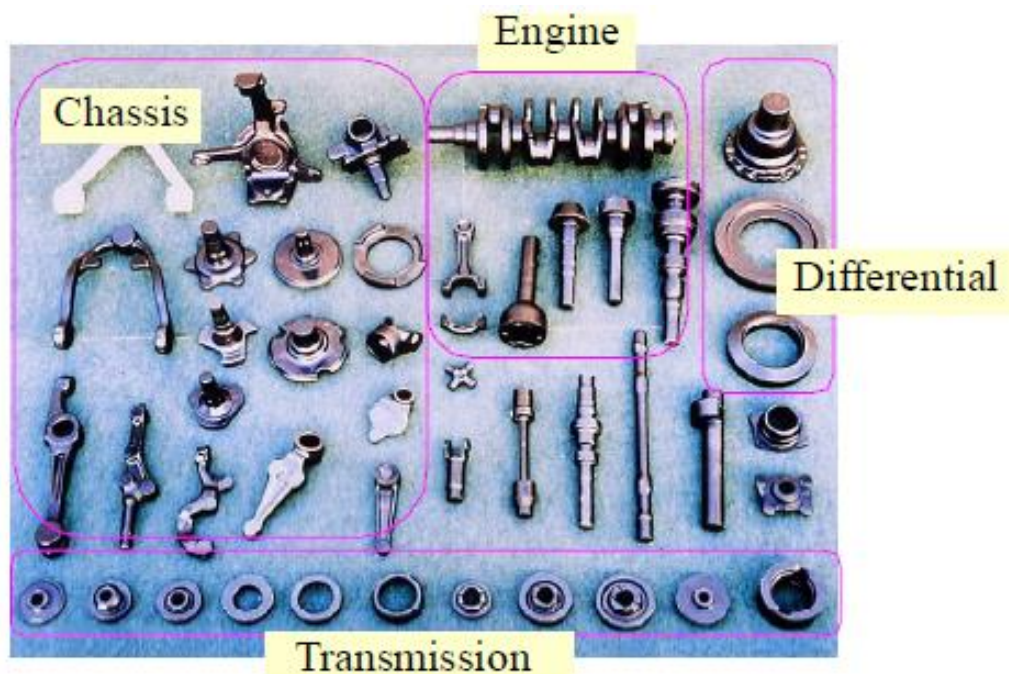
Hot forged automobile parts¹⁻¹⁾
